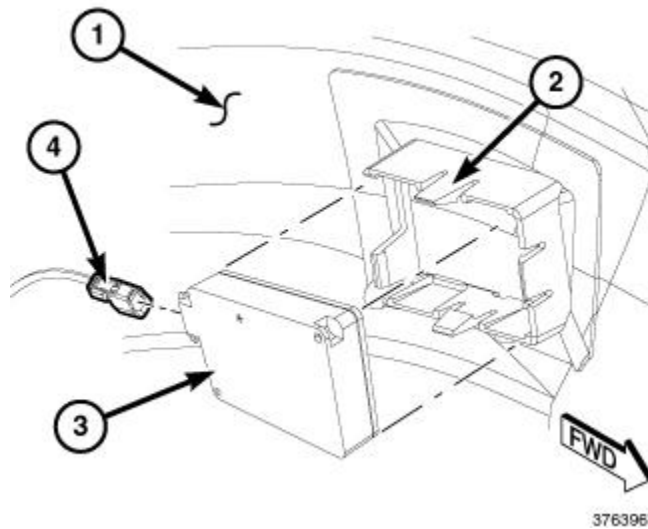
Blind Spot Sensor, Latch Tabs & Harness Connector
